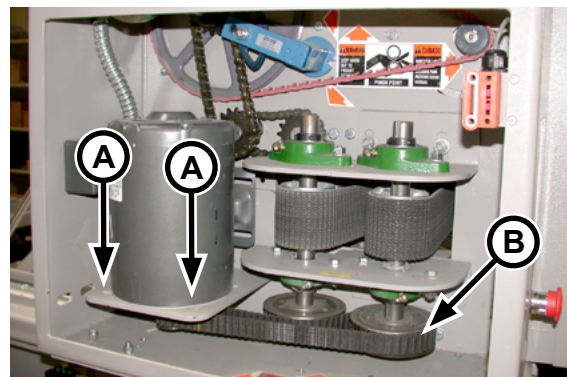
The bolts holding the lower spreader belt drive motor are in slotted holes.
